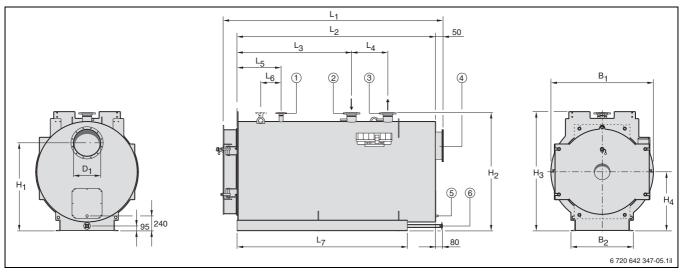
Dimensions Logano S825L, boiler sizes 650 to 5200 (dim. in mm)
